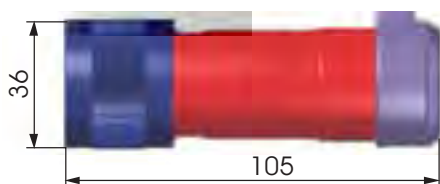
Plug with cage clamp terminals (plastic/ metal)
